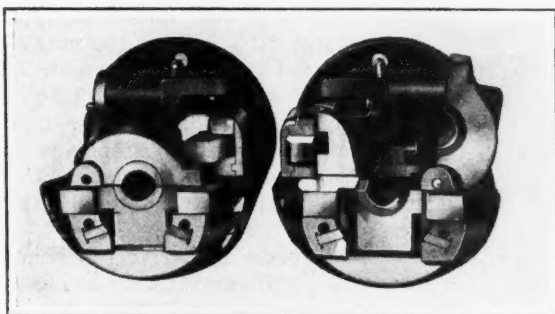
Hydraulic Chucks Used on a Crankpin Turning Lathe
